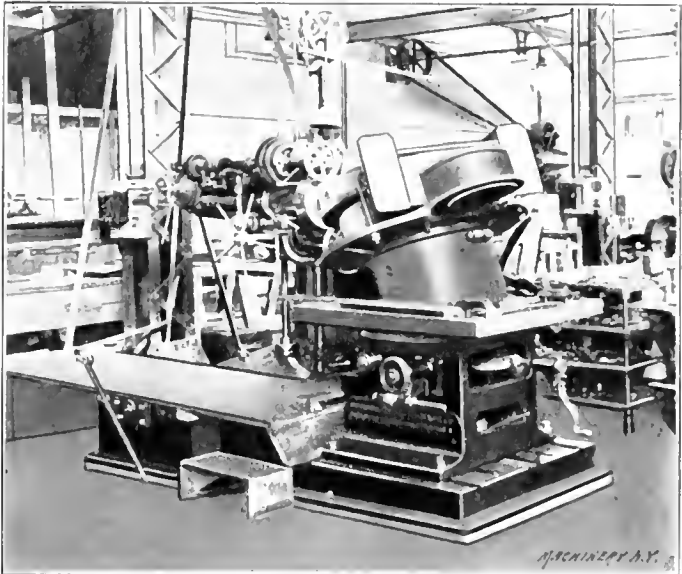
Boring the Holes in Wheel Casing for the Nozzles, by means of a Special Fixture on the Boring Machine.
